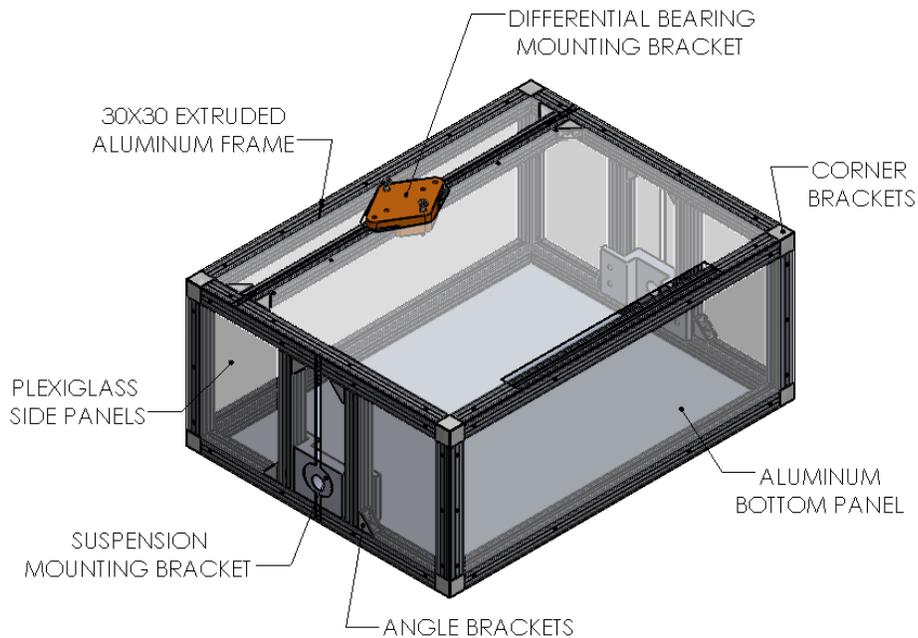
Labeled isometric CAD assembly of the chassis subsystem.
